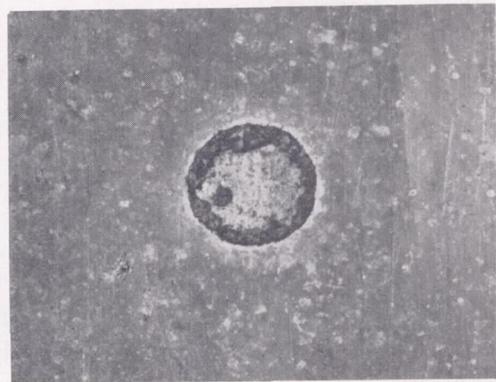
Type R. Deeply pitted dark ring on circumference of weld, X3.
